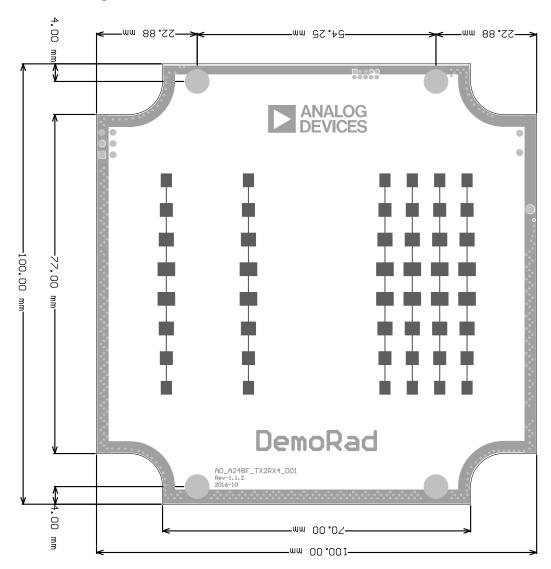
Dimensions of the 24-GHz radar system including the position of the mounting holes.
